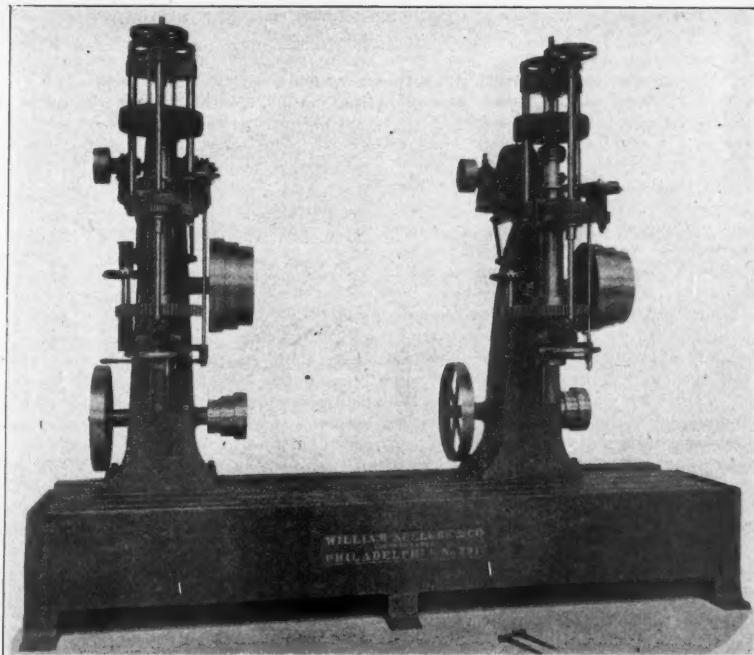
The Sellers Locomotive Rod Boring Machine.
